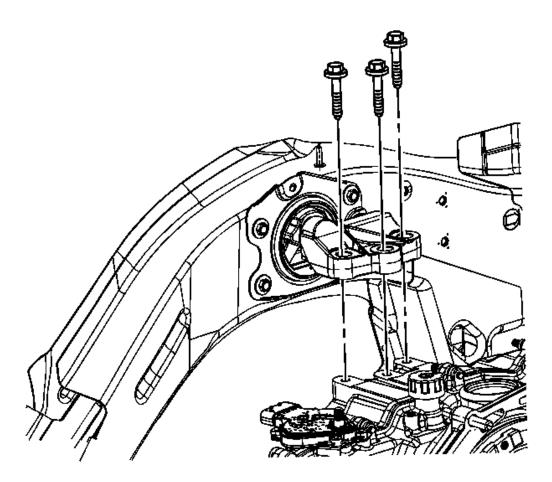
Identifying Frame Bolts Courtesy of GENERAL MOTORS CORP.
